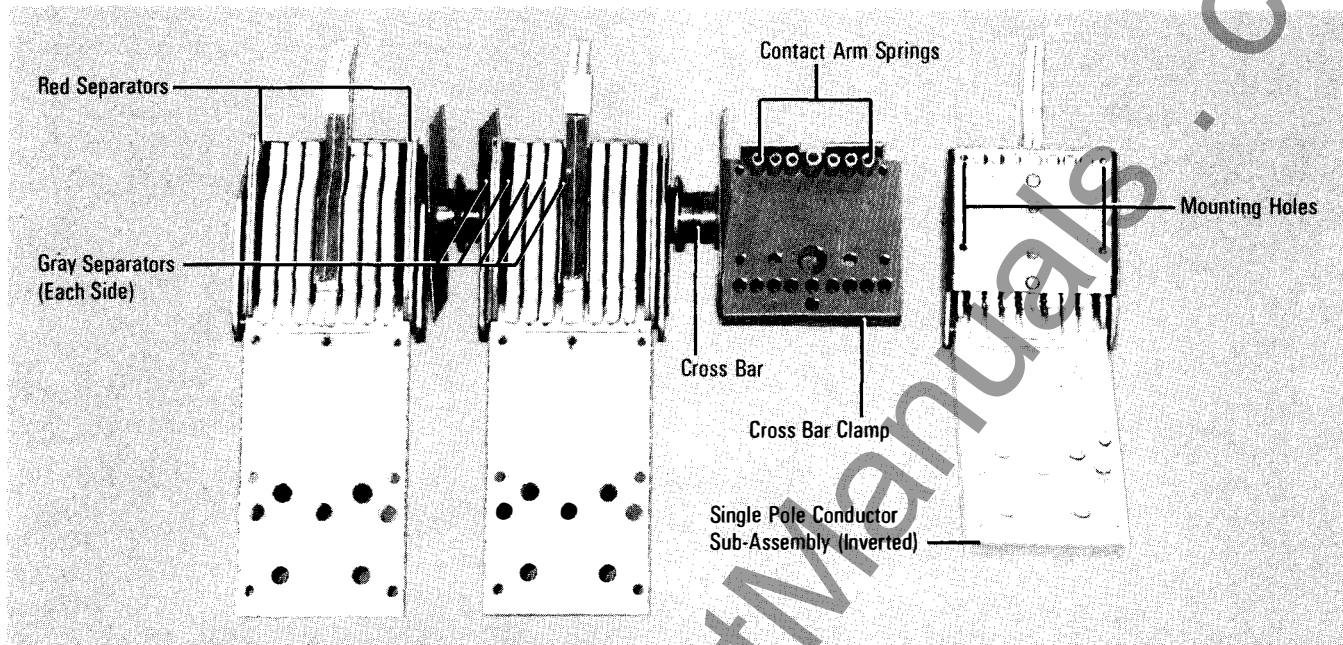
Moving Contact Arm Assembly With One Single Pole Conductor Sub-Assembly Removed.
